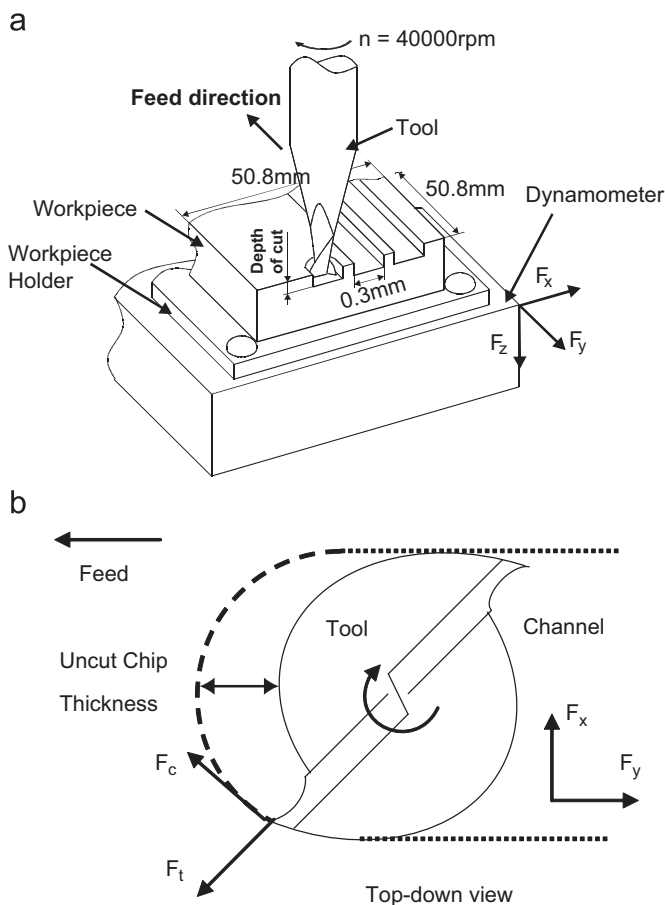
Schematic of micro end milling: (a) three-dimensional view of the experimental setup and (b) end view of the cutting process.
